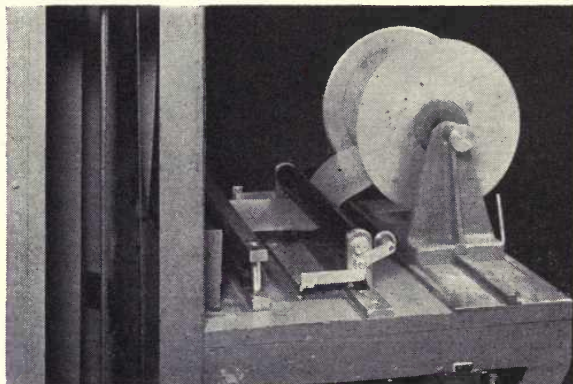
Loading ledge of machine, with automatic run-out break and audible alarm.
